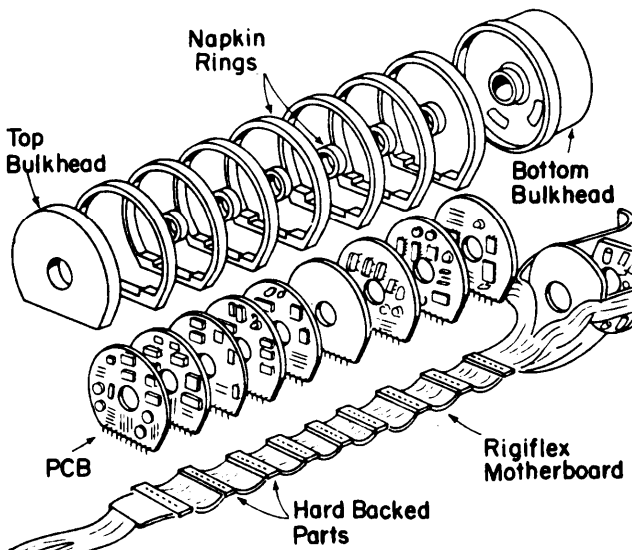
Packaging Example of a Multiple PCB Network (Ref. 14)
